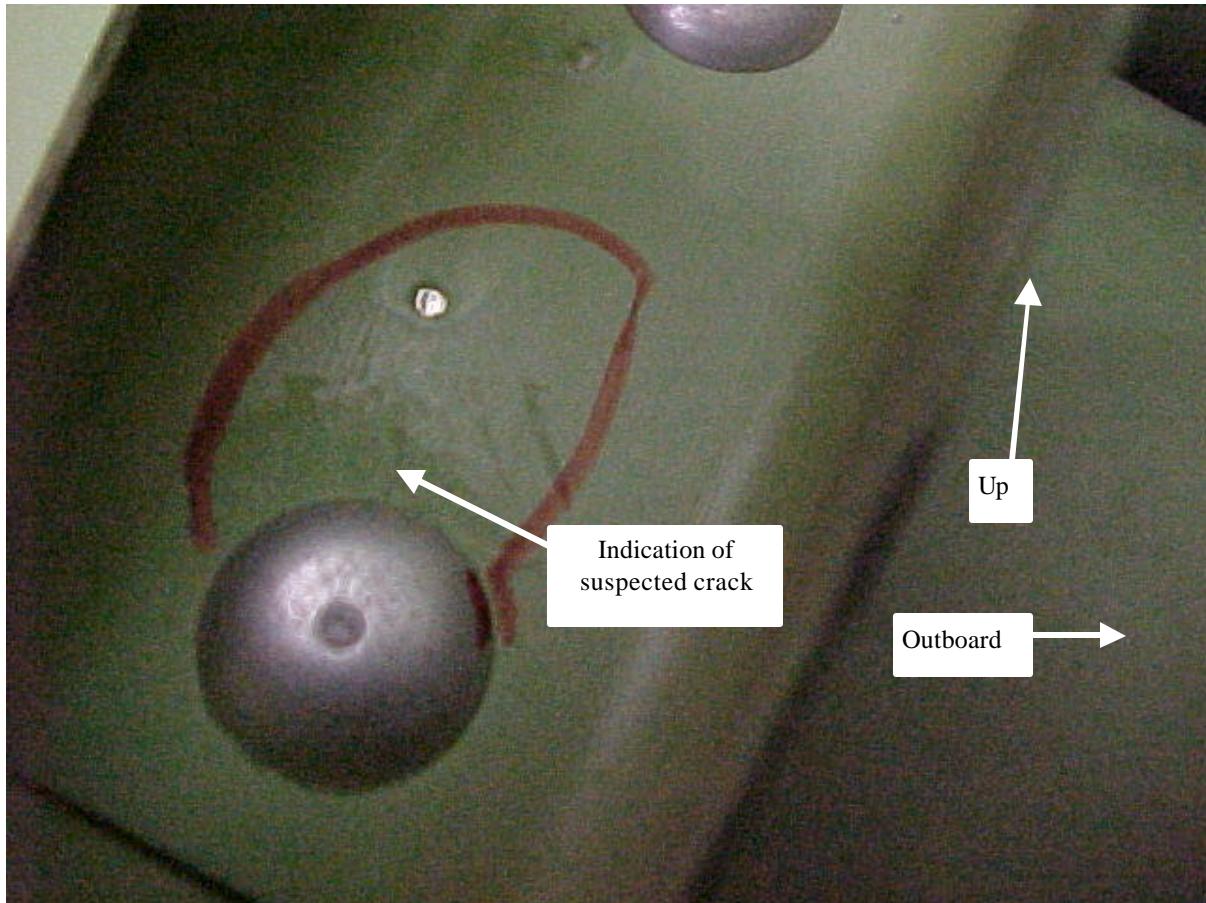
Photograph of stringer clip at FS 660, stringer 4R. Detailed visual inspection discovered an indication.
